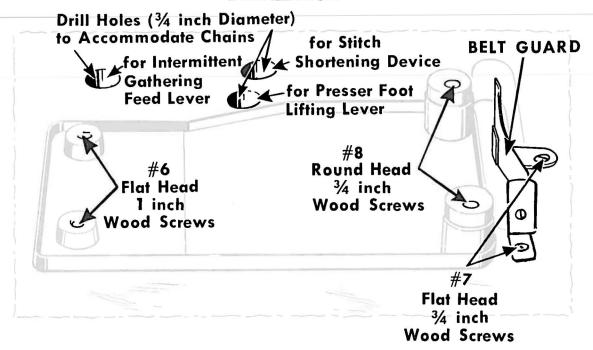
Machine Base on Table, Showing Position and Drill Sizes of Holes Required for Installation
